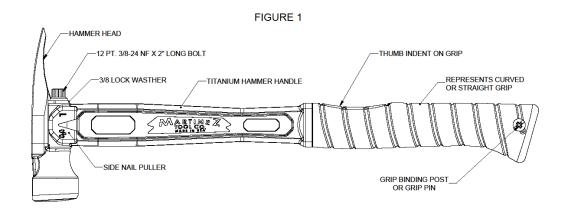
above illustrates the components used in a Martinez Tools Titanium handle hammer assembly and their relative position for correct assembly. The side nail puller relative to the hammer head and thumb indent on the grip is important for correct assembly and will be discussed pertaining to the parts being assembled.
